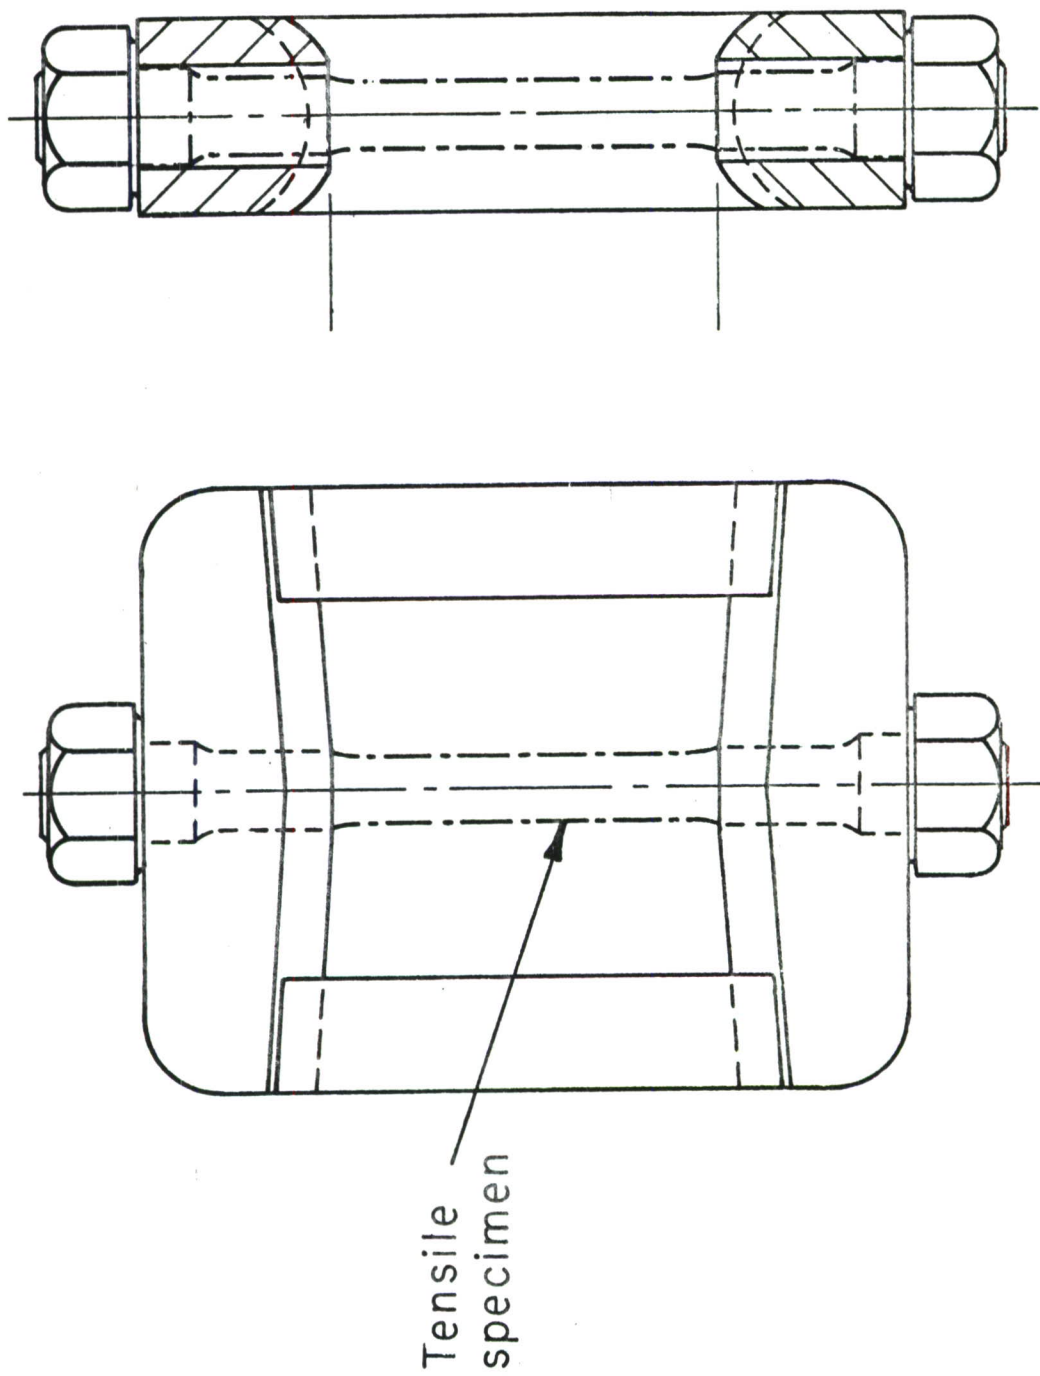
Stressing Frame for Stress Corrosion Tests of Tensile Specimens.
